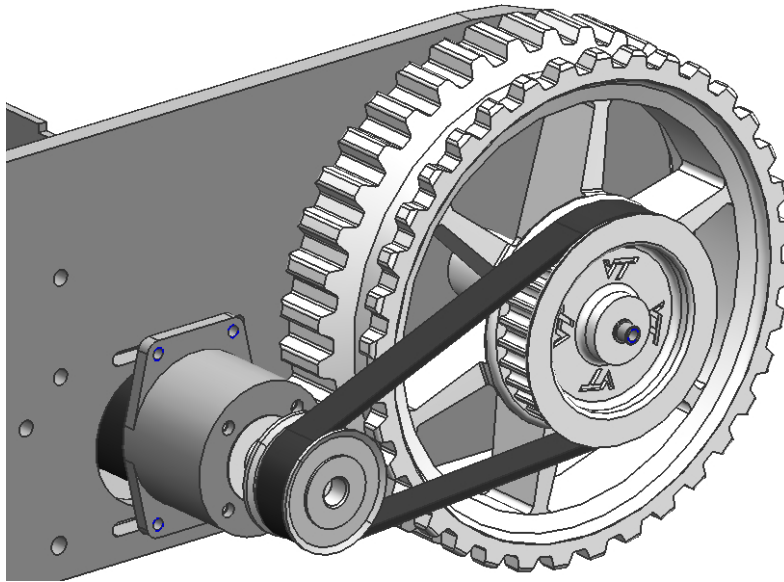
CAD model of the belt drive assembly. A plate covering the belt and pulleys has been removed for the purpose of this image.
